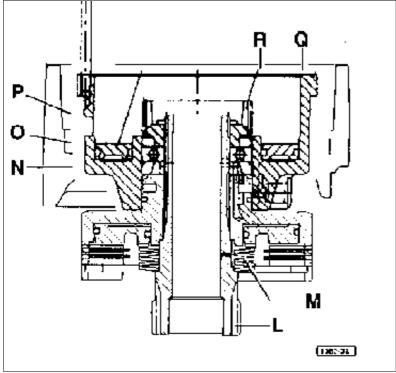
Preassembly of parts on MEDIUM shaft.
